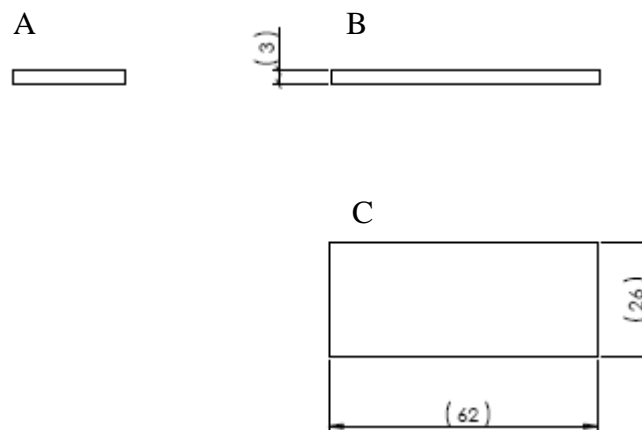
An acrylic box no.2 drawing in mm scale, (A) side view, (B) front view and (C) top view.
